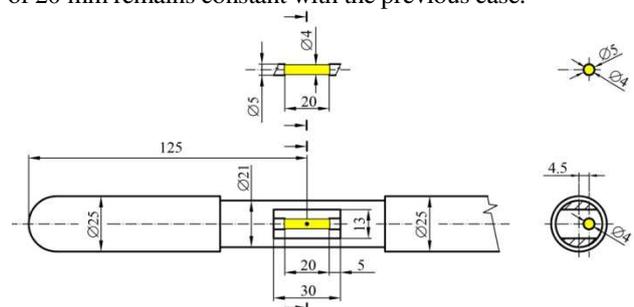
The modified shape design and dimensions of the extinction probe head – *VarP2*.
